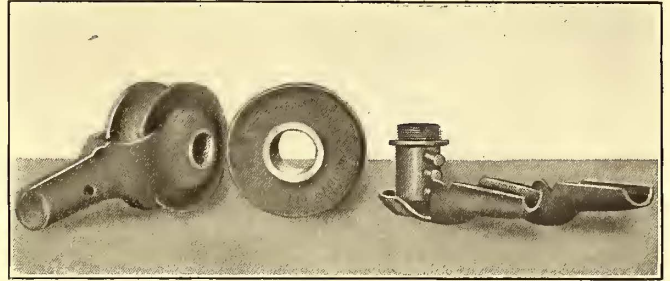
TROLLEY-WHEEL AND HARP ASSEMBLED AND TAKEN APART TO SHOW THE LUBRICATING PENCILS
